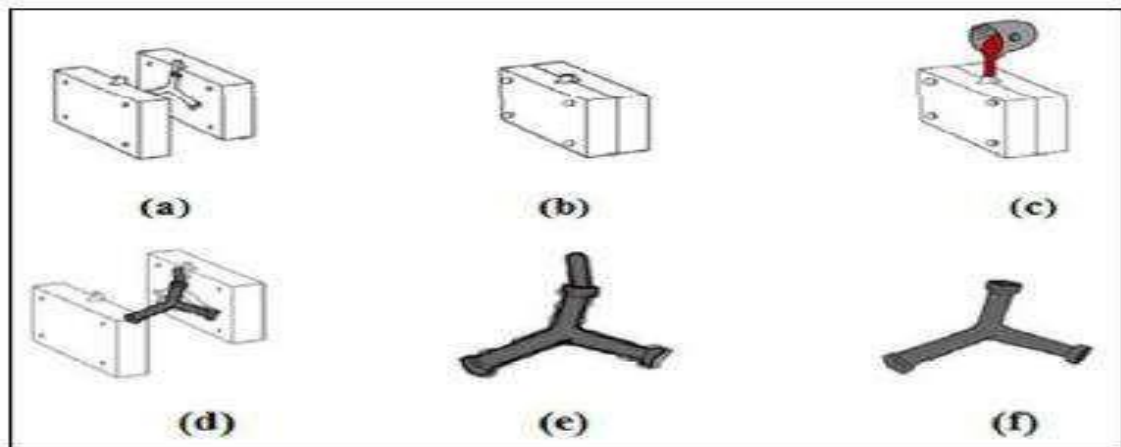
Main steps of the shell molding process (a): mold dies, (b): assembly, (c) making the casting, (d):separating the dies, (e): cluster former (f): extracting then debarring [8].
